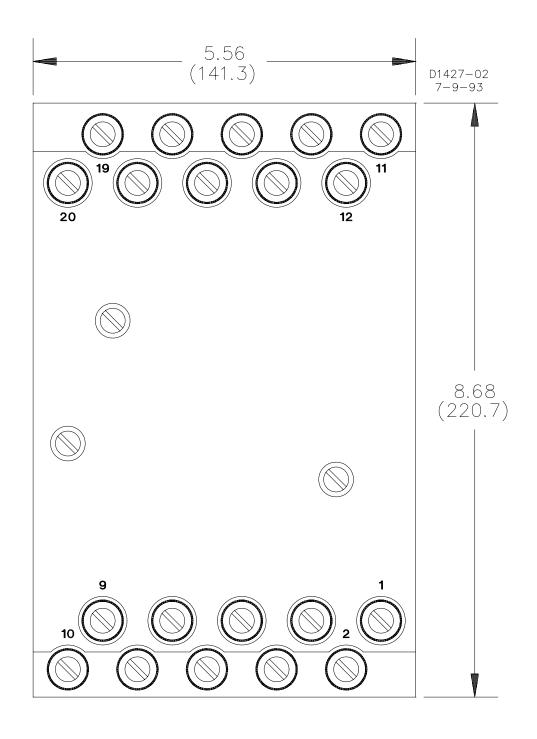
S1 Case, Outline Dimensions, Rear View
